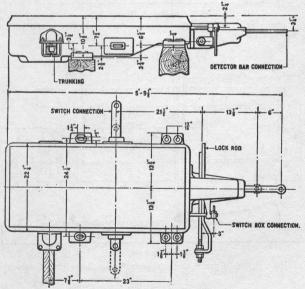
Dimensions of Model 4 Switch Machine for Single Switch or Derail
